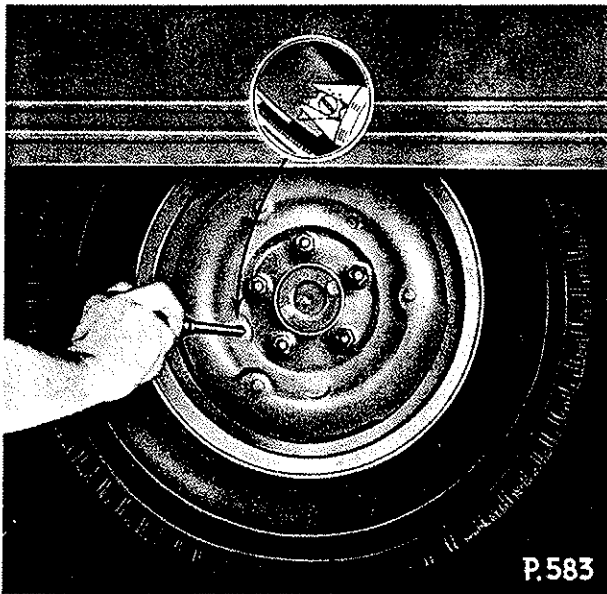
Adjusting the rear brake shoes (off-side illustrated)
